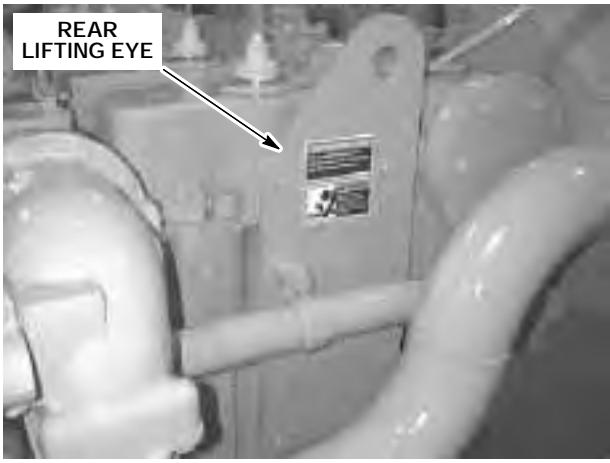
Rear Lifting Eye F18/H24GSID/GL/GLD
